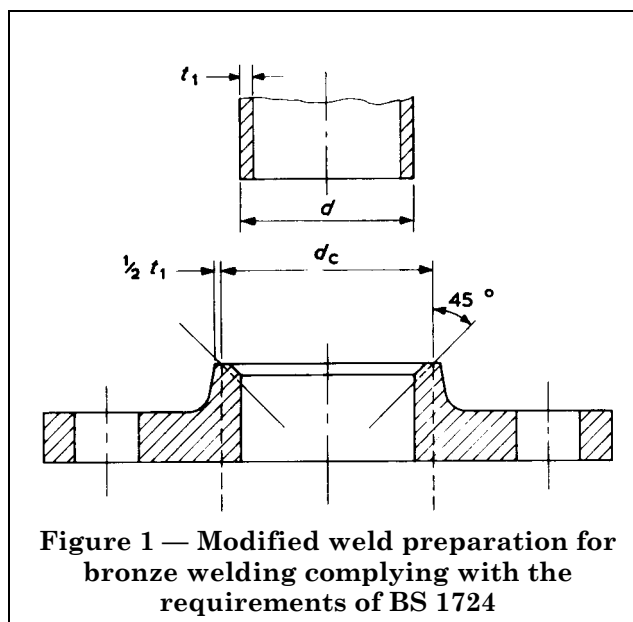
Modified weld preparation for bronze welding complying with the requirements of BS 1724
